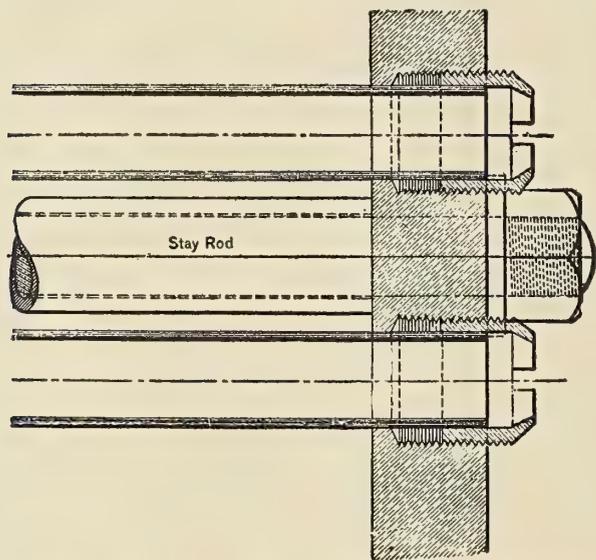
FERRULES AND TUBE PACKING IN SURFACE CONDENSER
